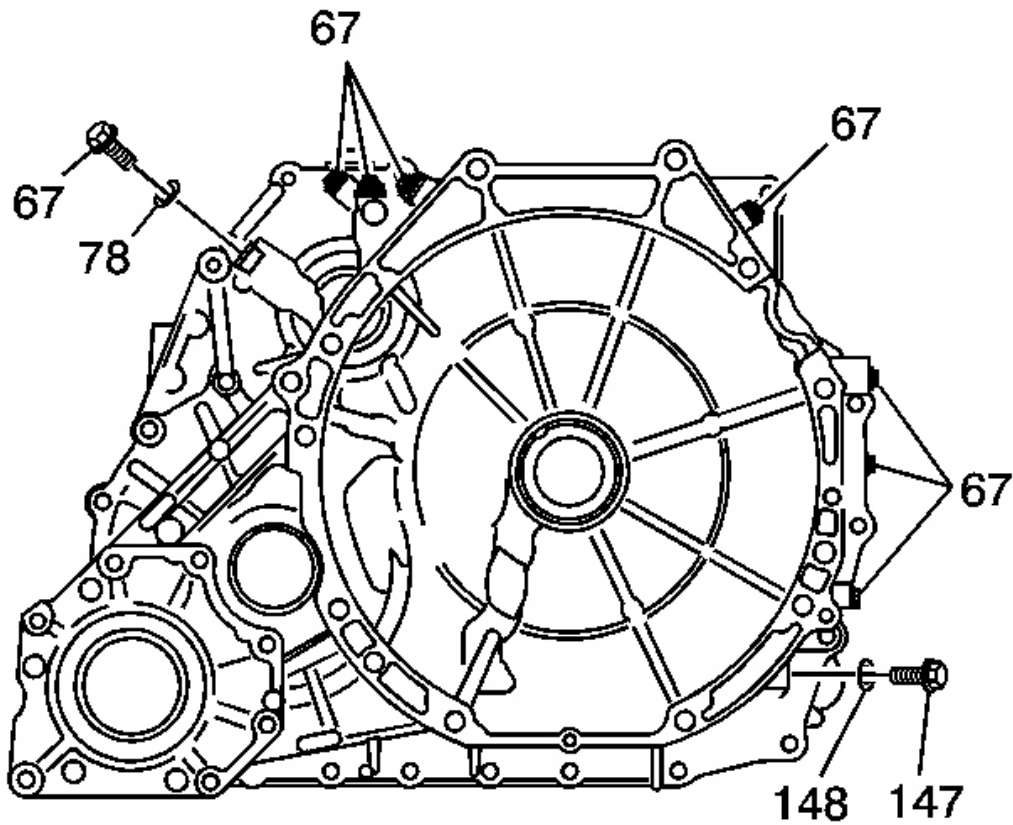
Case Plug, Sealing Washer & Fluid Pressure Test Hole Plugs
